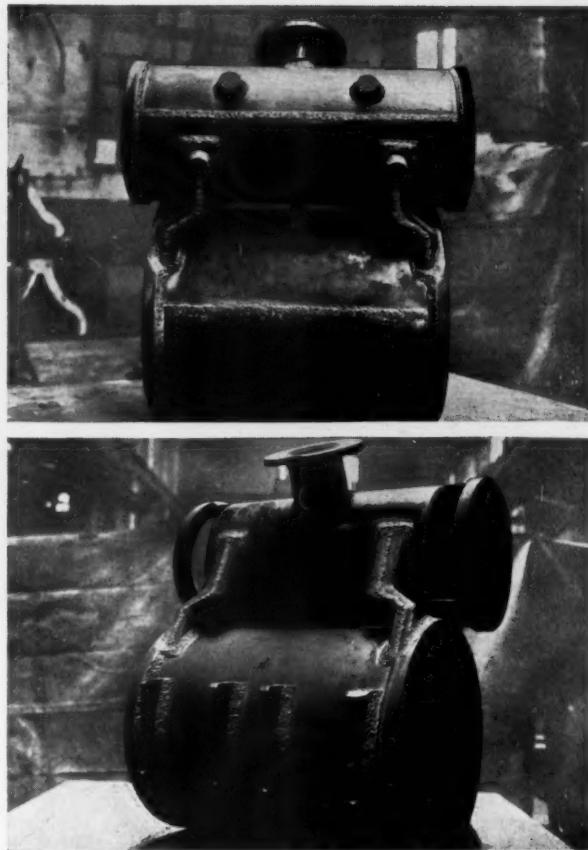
Assembled cylinders and steamchests of all-welded construction as seen from both sides
